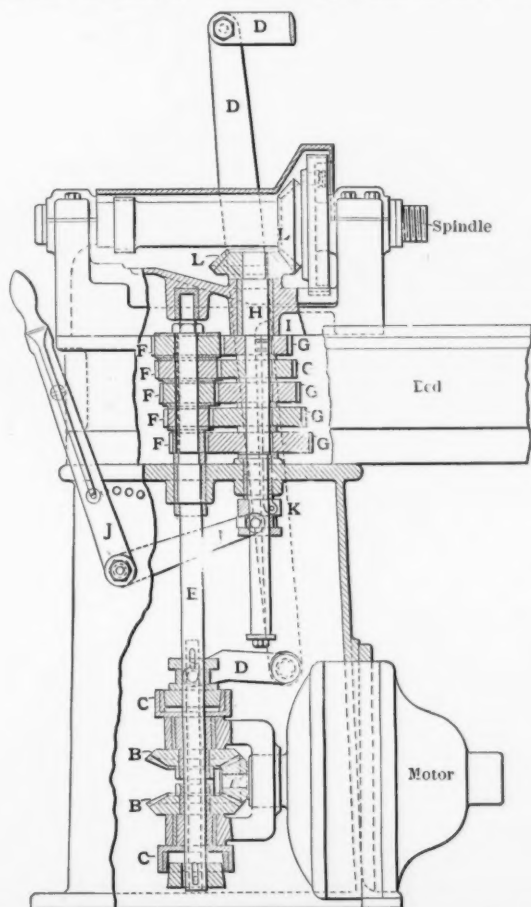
DETAILS OF THE VARIABLE-SPEED GEARING AND ARRANGEMENT OF MOTOR IN THE BOX LEG.—THE FLATHER LATHE.
